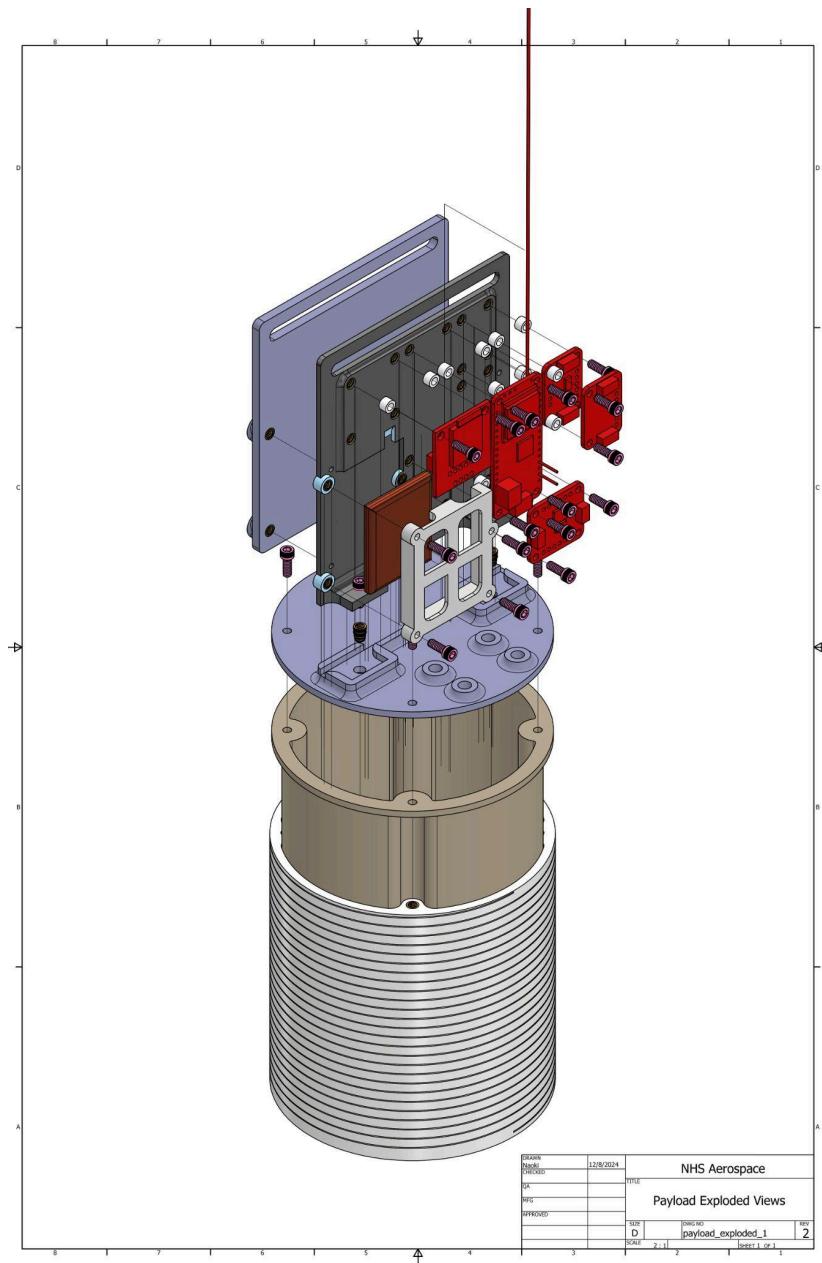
Payload assembly exploded view (antenna has been cut off for optimizing image size)
